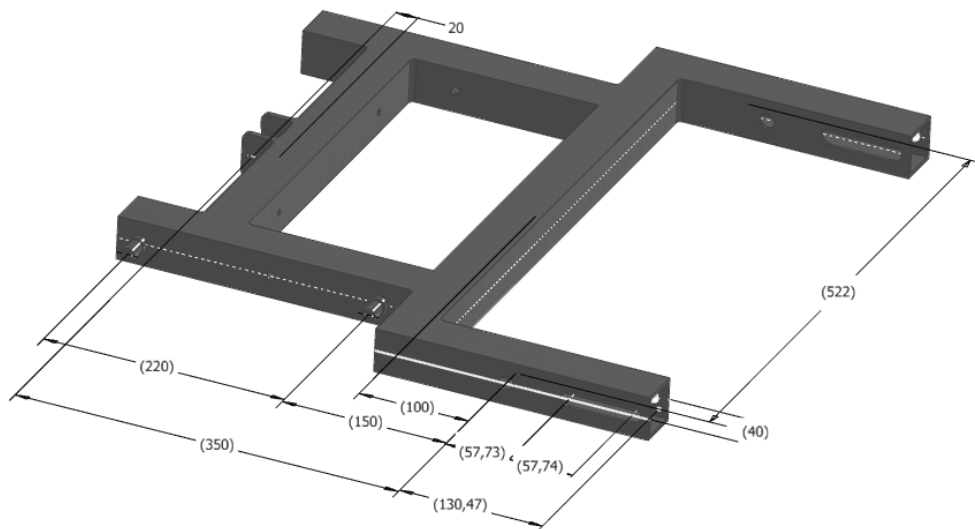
Basic dimensions of Seat Base. Dimensions in mm.
